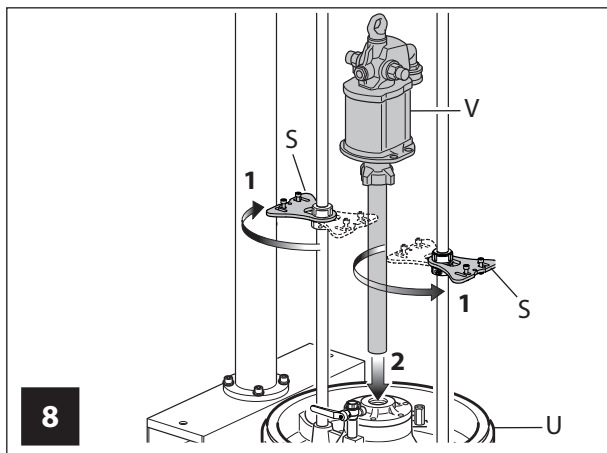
After turning the pump holder brackets "S" outwards, position the suction tube of the pump "V" inside of the reducer of follower plate "U".
